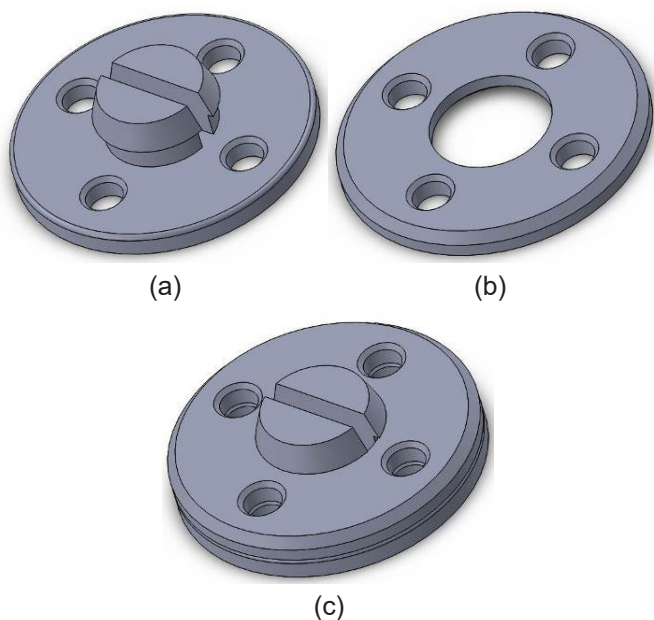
The CAD model layout: a) base, b) cover, c) assembly
